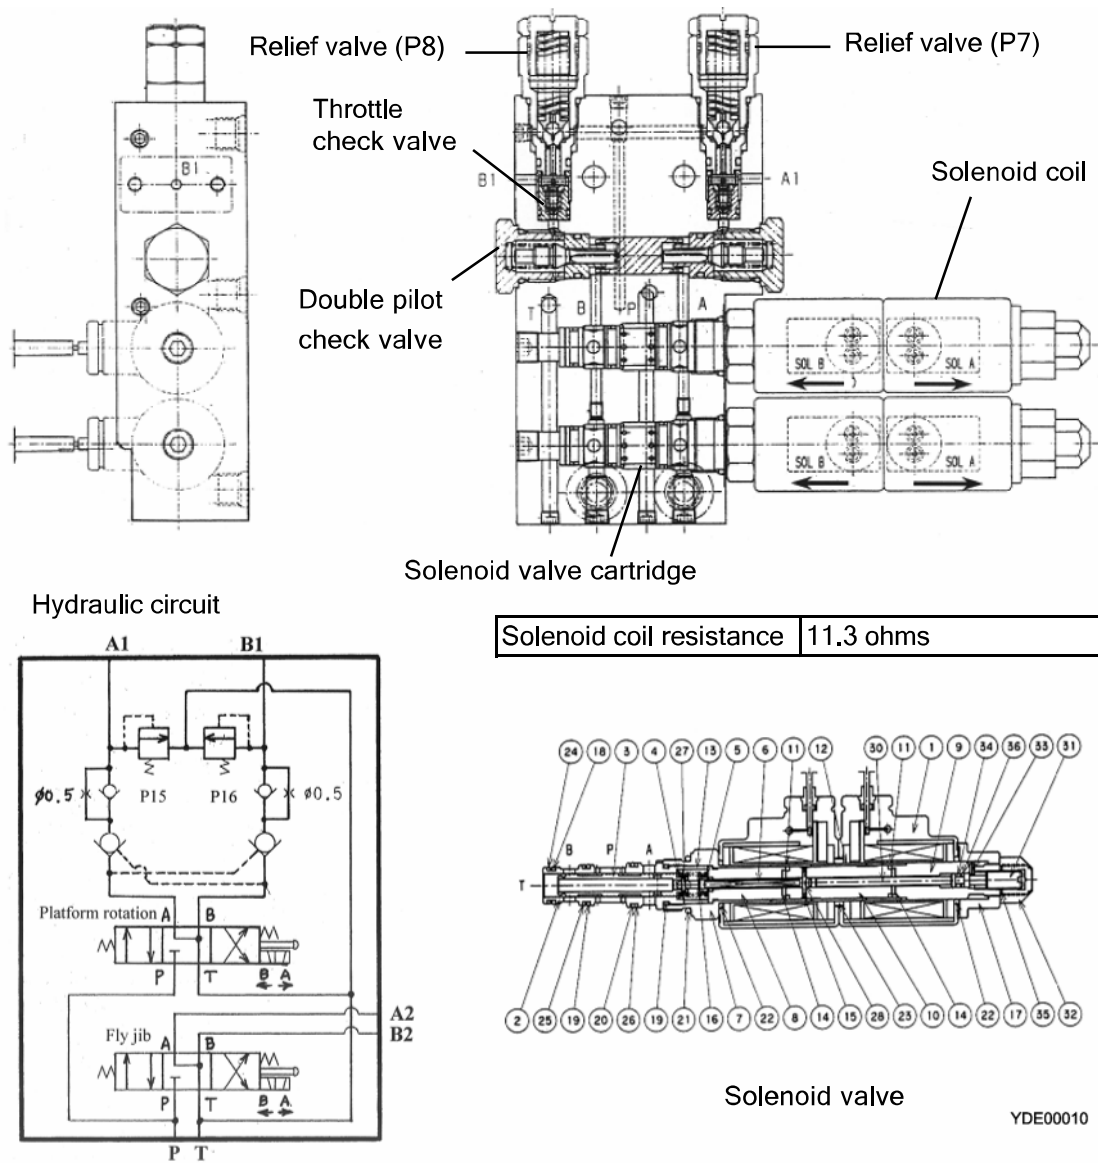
Platform rotation / Fly jib solenoid valve
